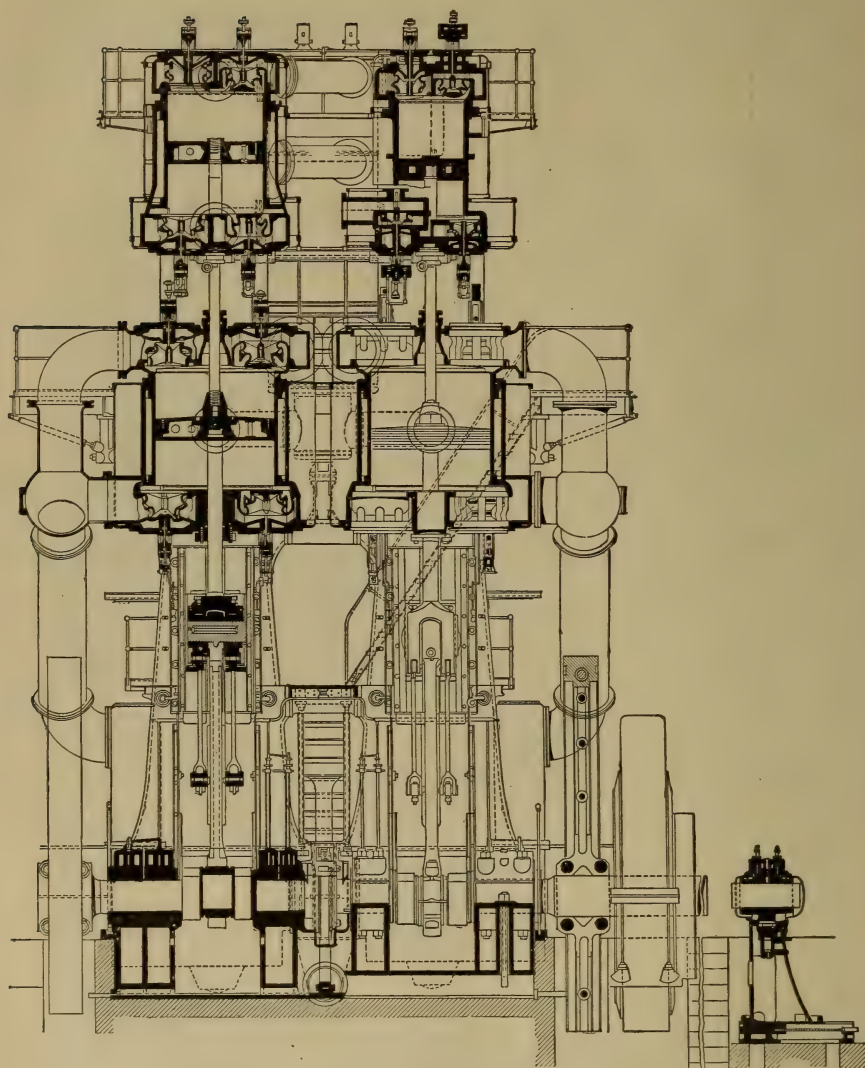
3000 H.P. Sulzer Engine Designed for Highly Superheated Steam.
